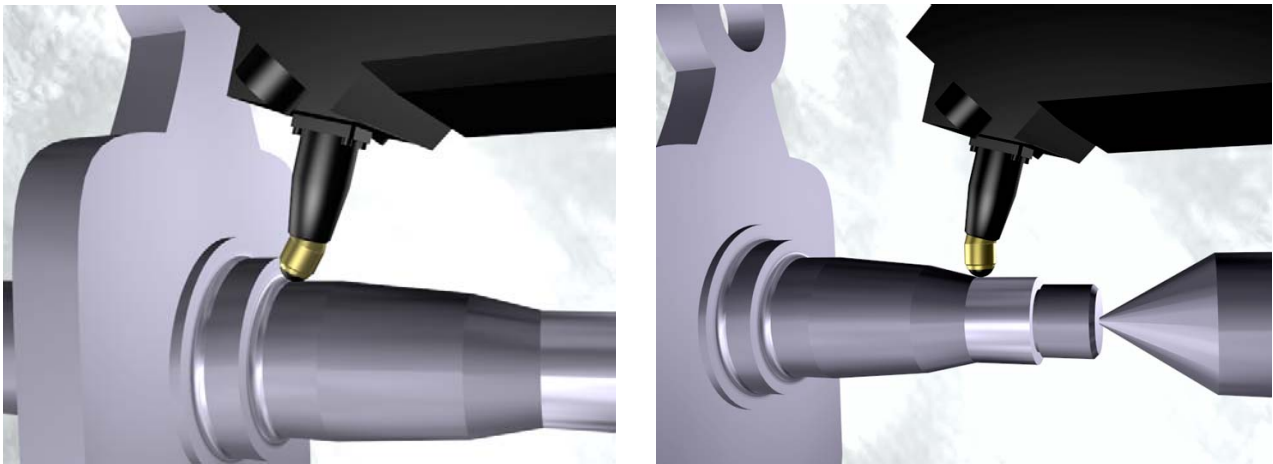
deep rolling of a knuckle fillet radius Fig. 7-7: roller burnishing of a bearing seat
